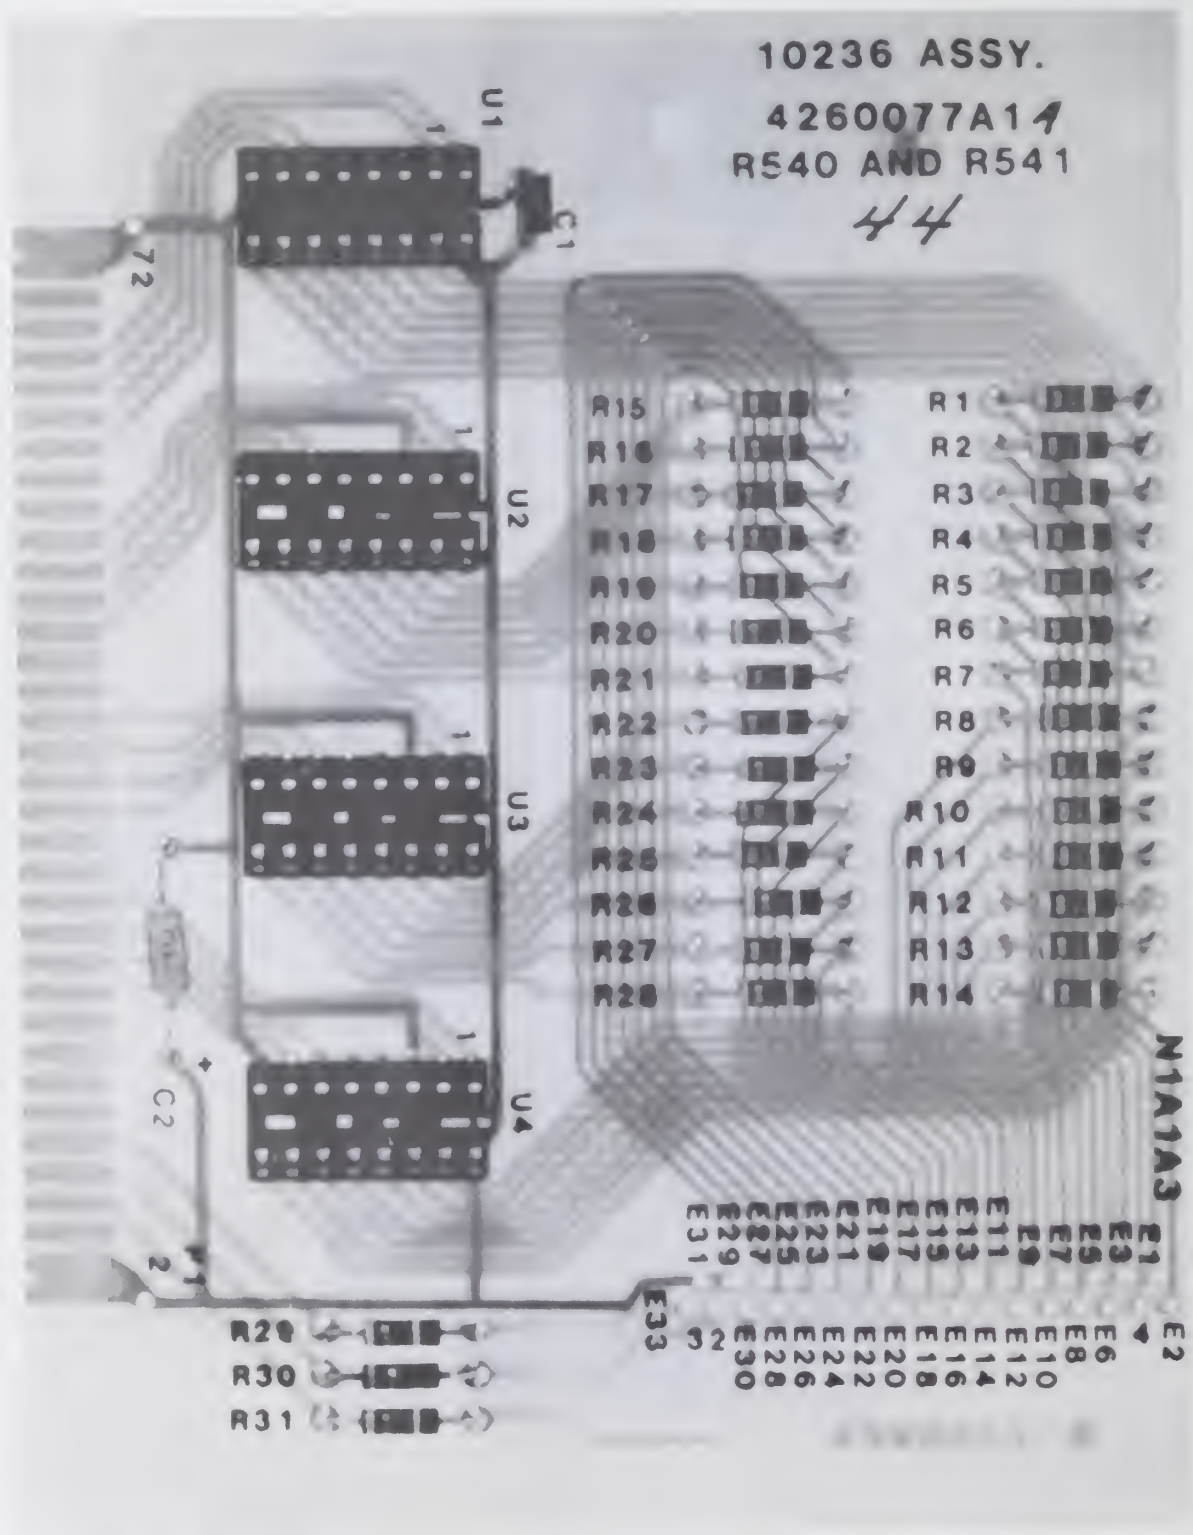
Display Mounting Board No. 1 N1A1A3 — Component and Wiring Side
